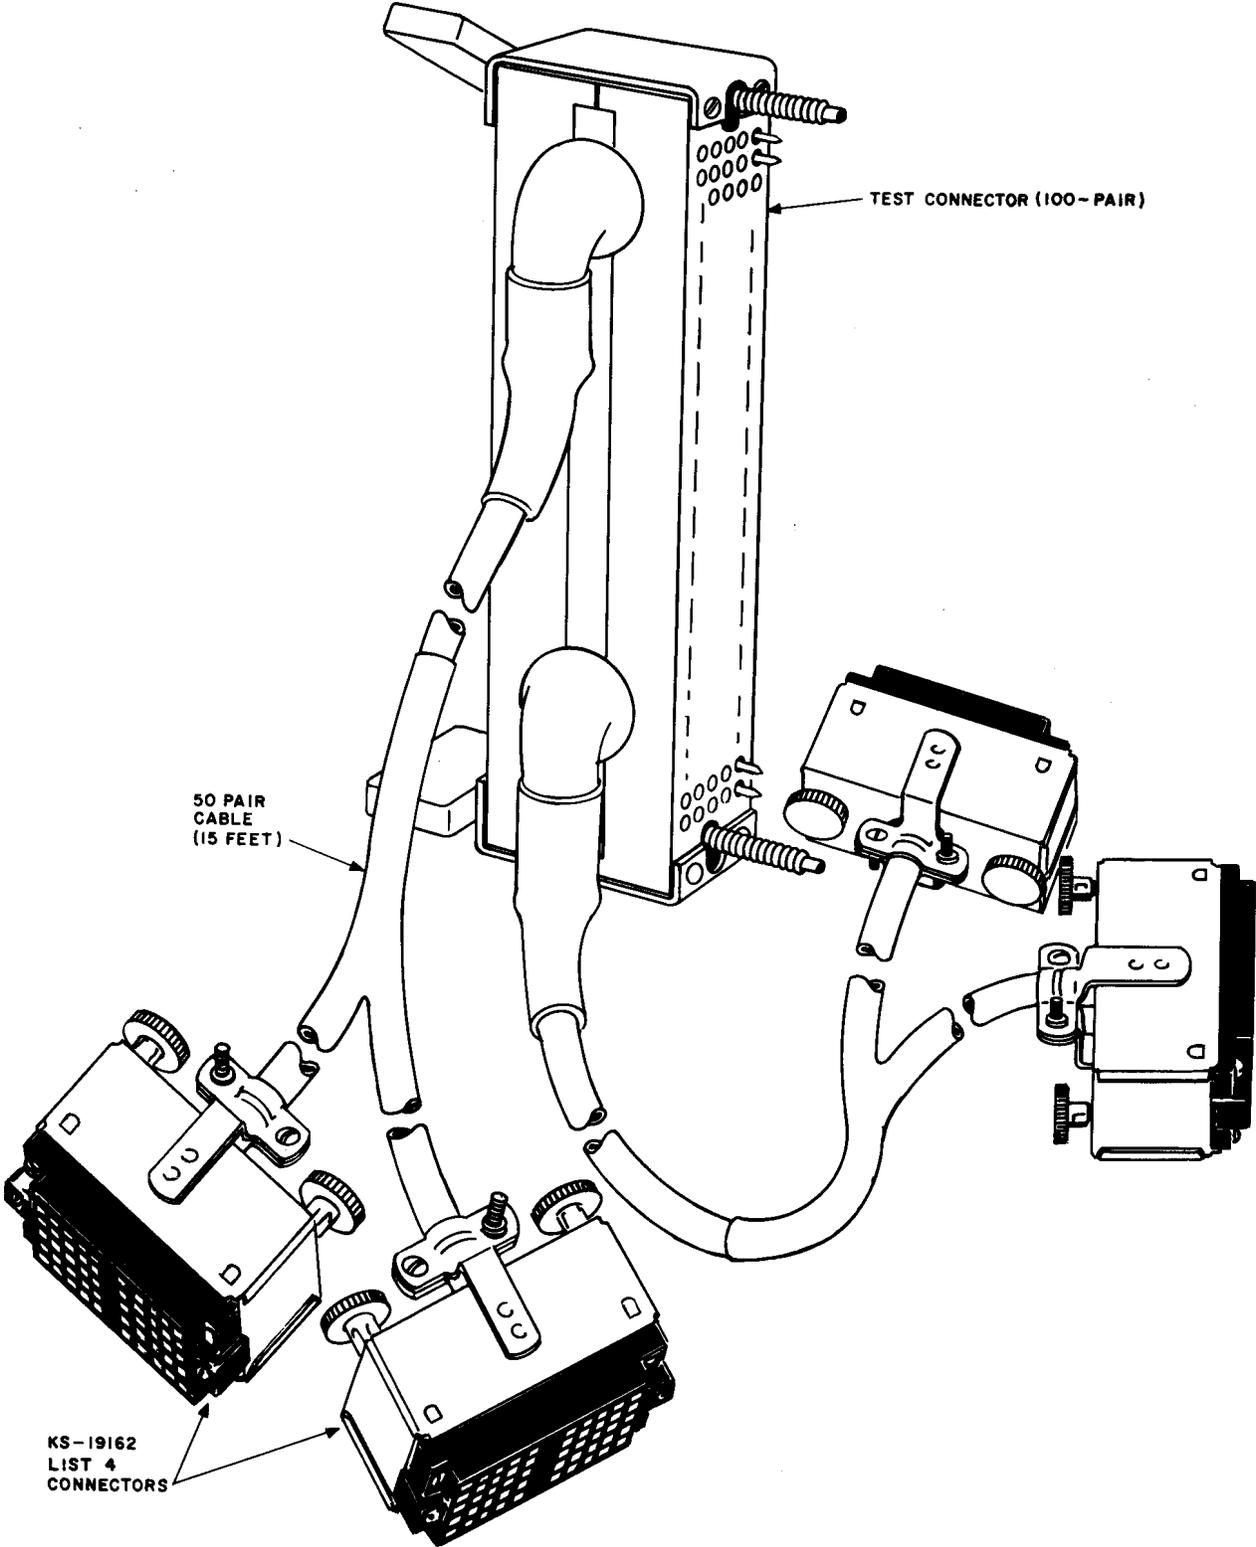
M Test Connector (AT-8823) (For 305-Type Connector)
